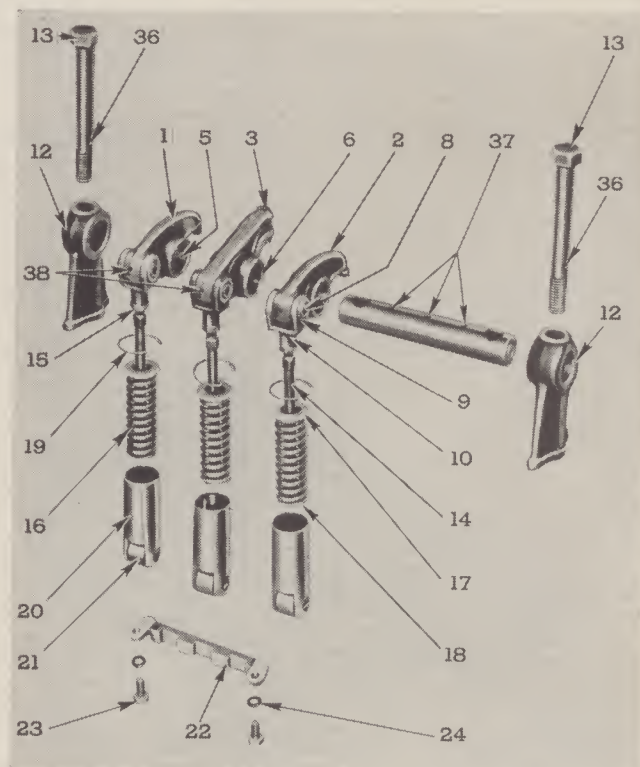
B—A GM engine showing details of the valve and injector operating mechanism for one cylinder.
